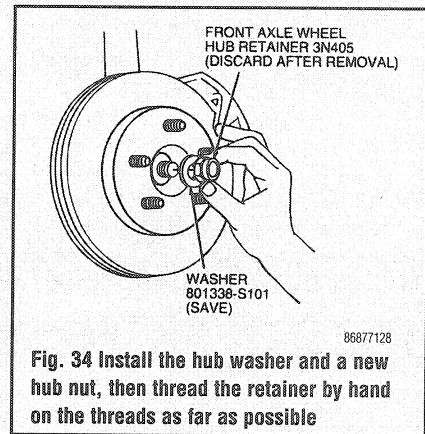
Install the hub washer and a new hub nut, then thread the retainer by hand on the threads as far as possible
